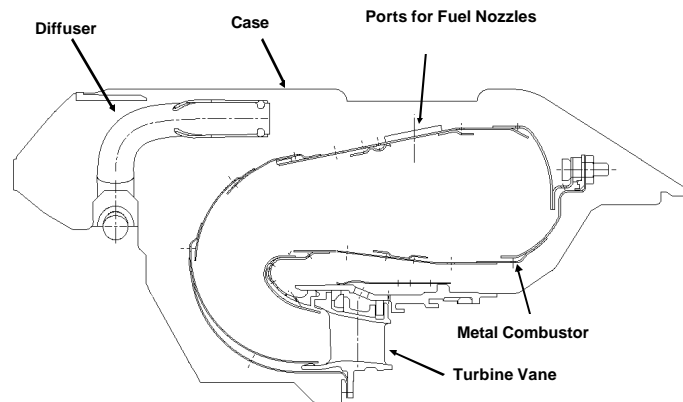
Standard metal combustor design for PW200 series engines
